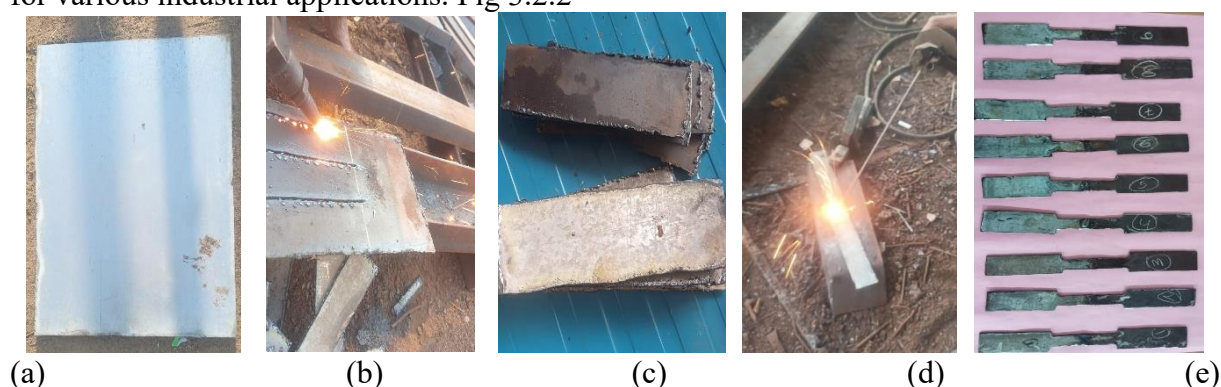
process flow from raw material to cutting pieces. (a) raw material of zinc and cast iron, (b) cutting on gas cutter, (c) final cut zinc and cast-iron piece (d) welding the cast iron and zinc work piece (e) after completion of welding of required specimen.
